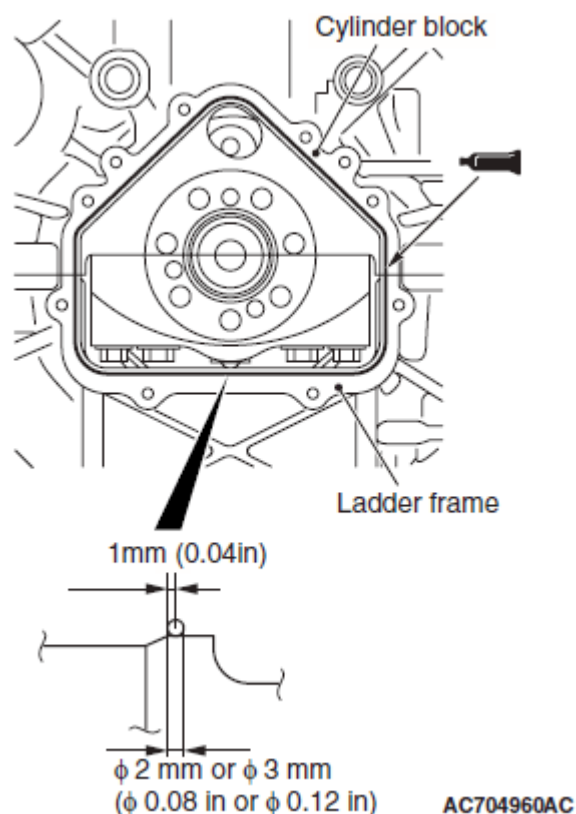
Identifying Crankshaft Rear Oil Seal Case Assembly To Sealant Applying Area
